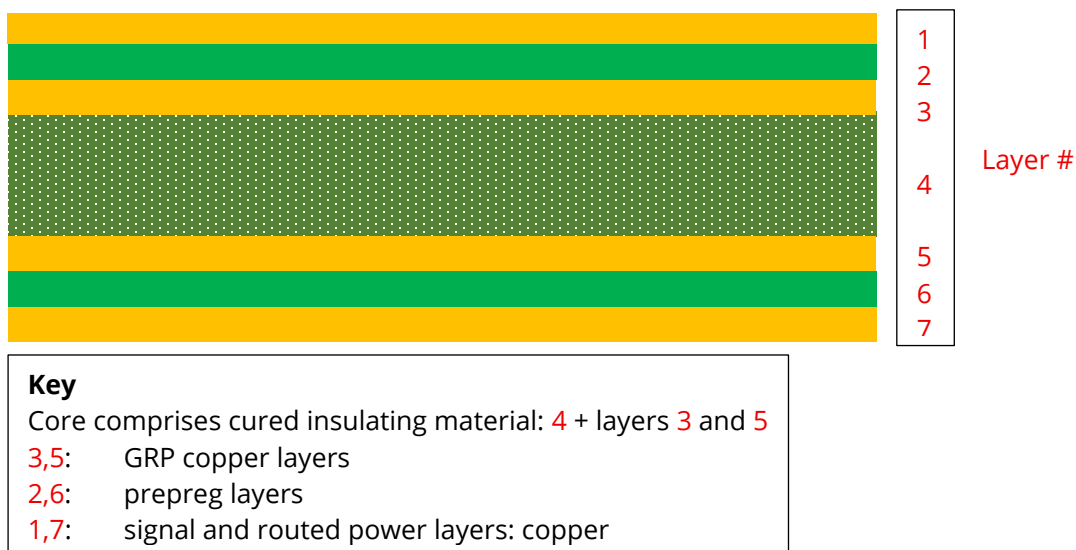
Cross-section of a 4-layer example board stack-up for EMC
